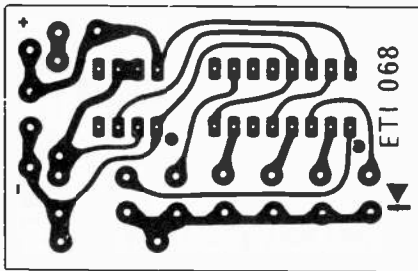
Printed-circuit board layout for the LED dice. Full size 55mm x 35mm.
